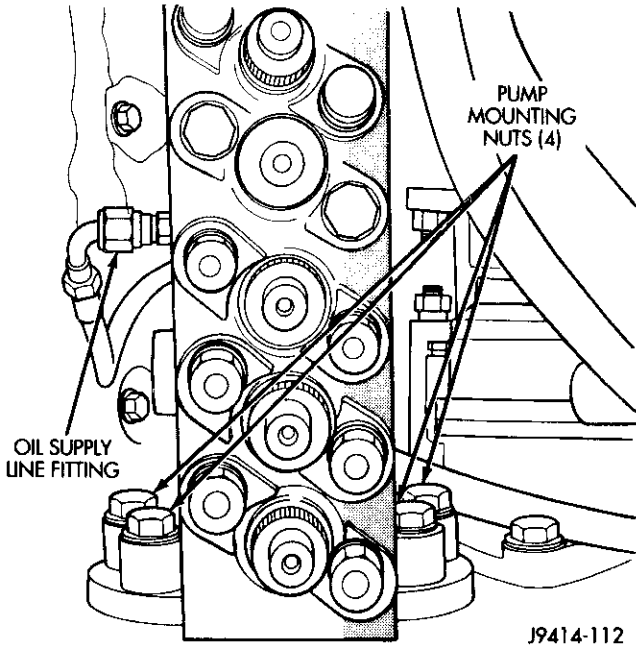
Engine Oil Supply Line—Pump Mounting Nuts
